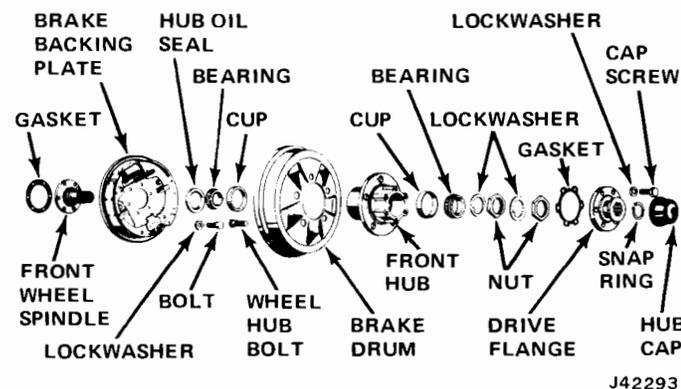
Front Wheel and Hub Assembly—CJ Models
